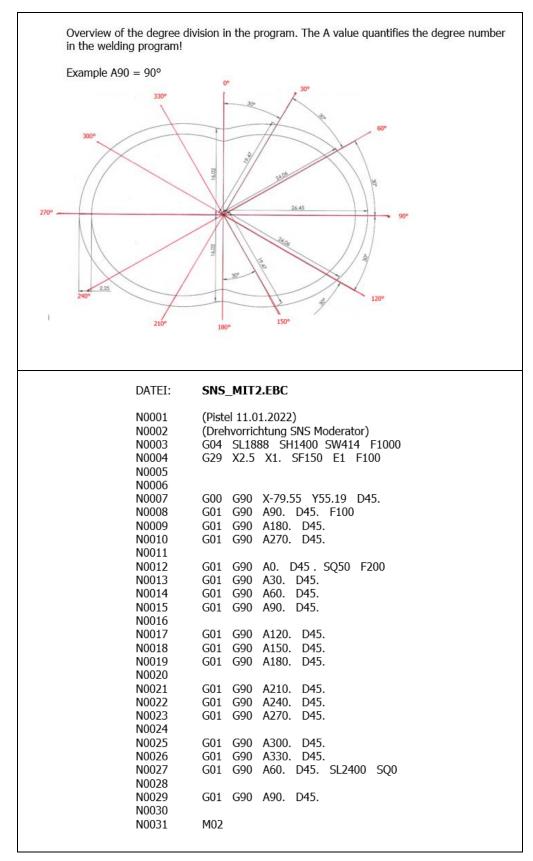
Program of the hydrogen vessel welding geometry
